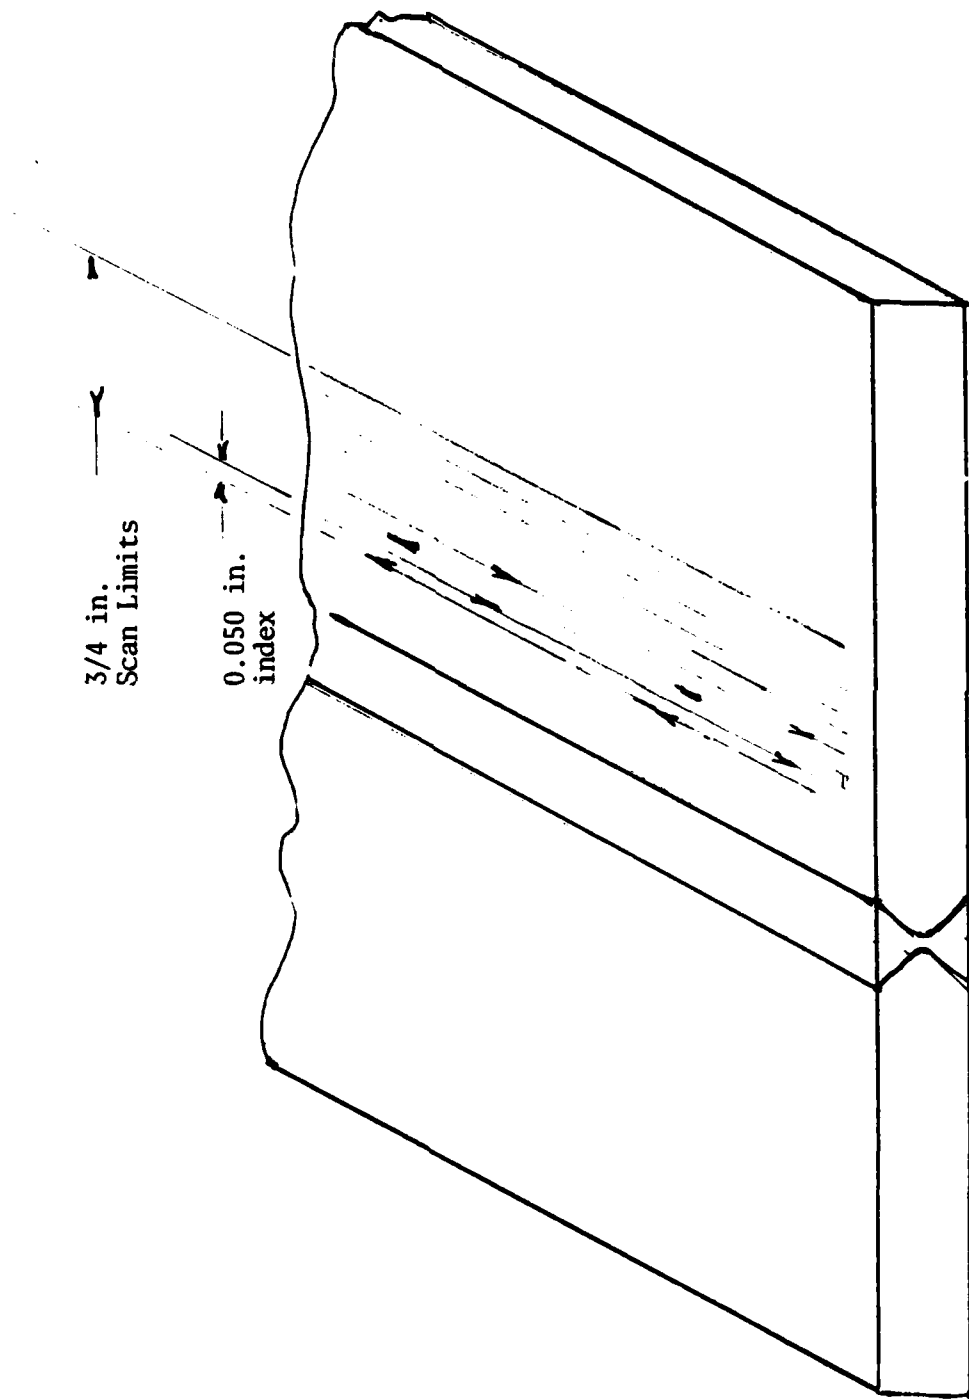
Ultrasonic Scan Pattern for Immersed Angle Beam (45°) Inspection of Weld Zone for 3/4 Inch Thick Plate
